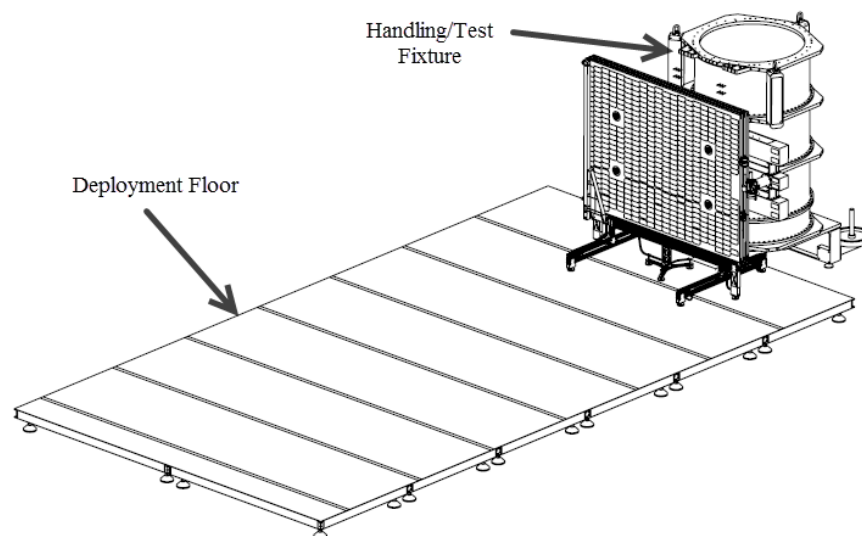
Solar Array Assembly Manual Deployment Test – Stowed Position
